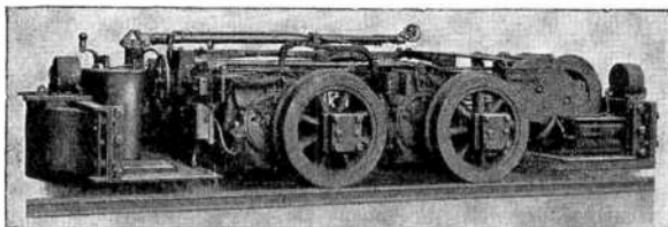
,174.—A mine locomotive with side frames removed to show position of motors.
